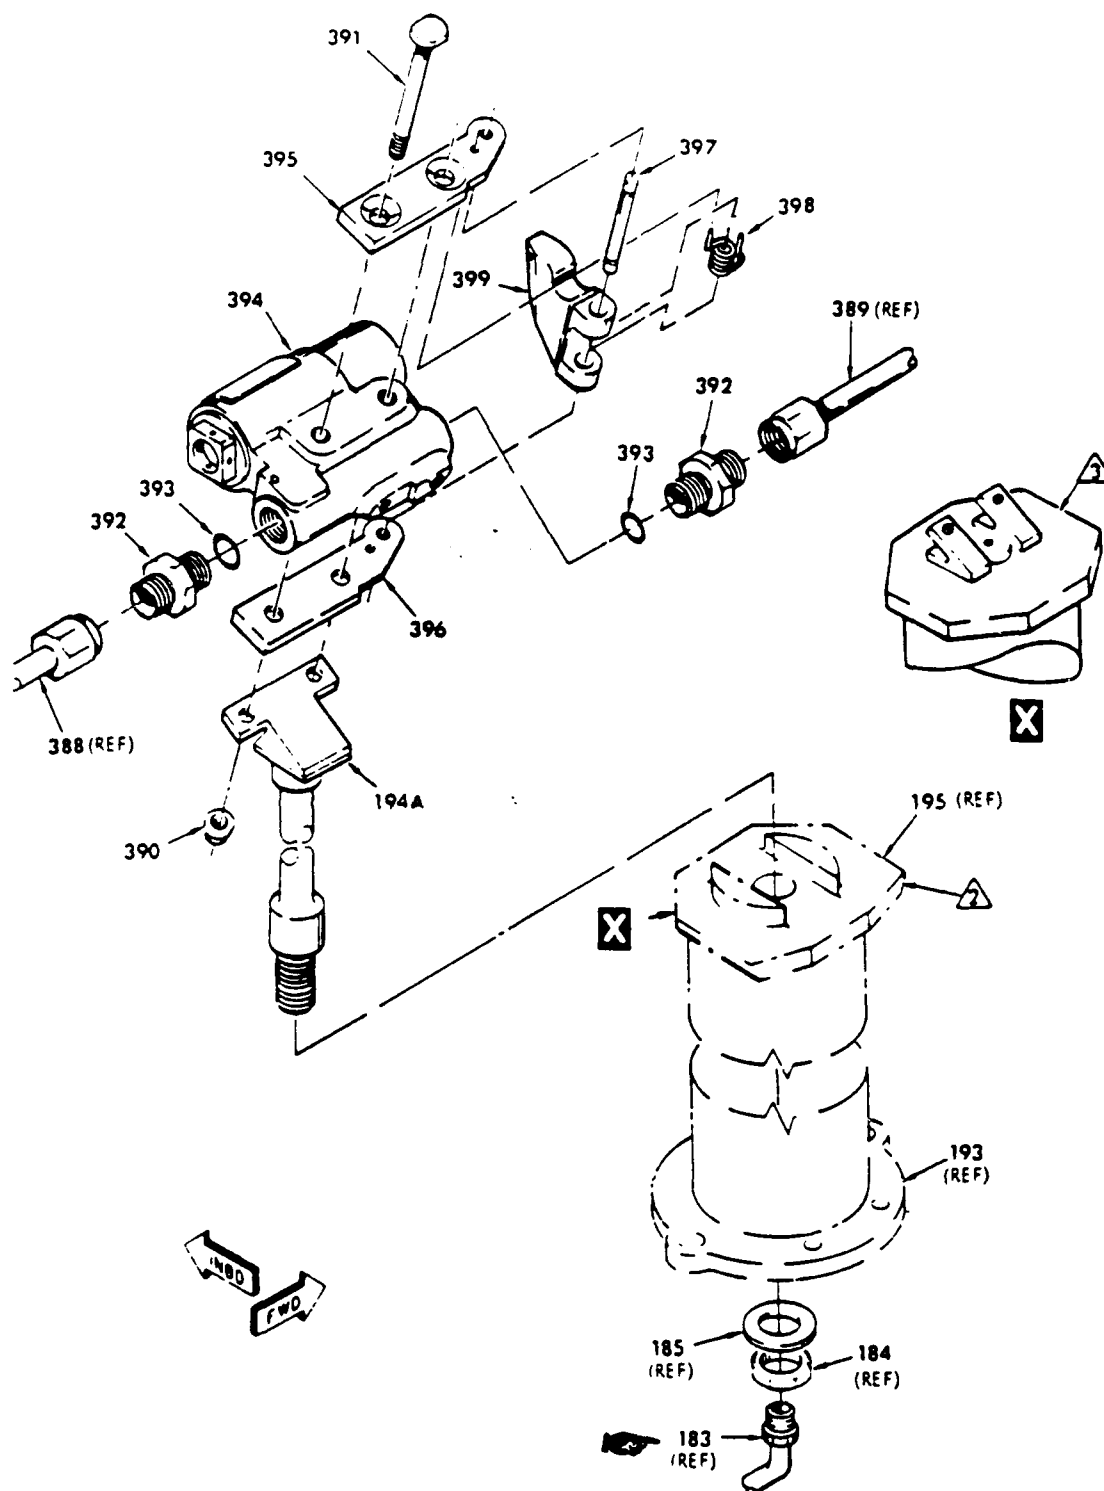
RH Aft Strut Assembly (Sheet 16 of 18)
